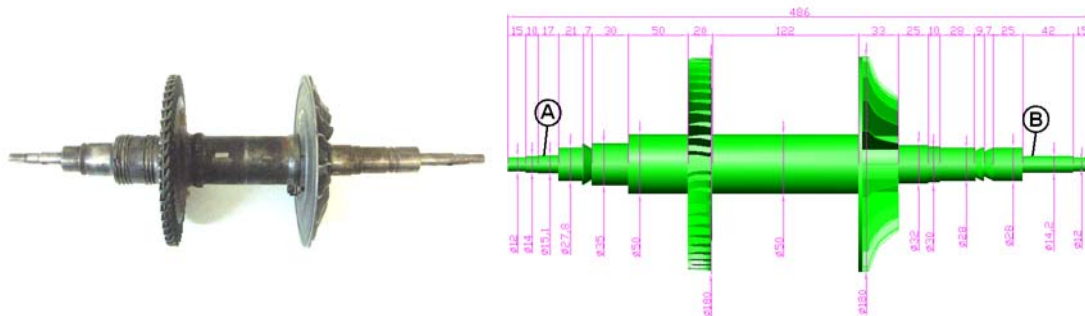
The selected shaft, its dimensions and seating positions (A, B)
